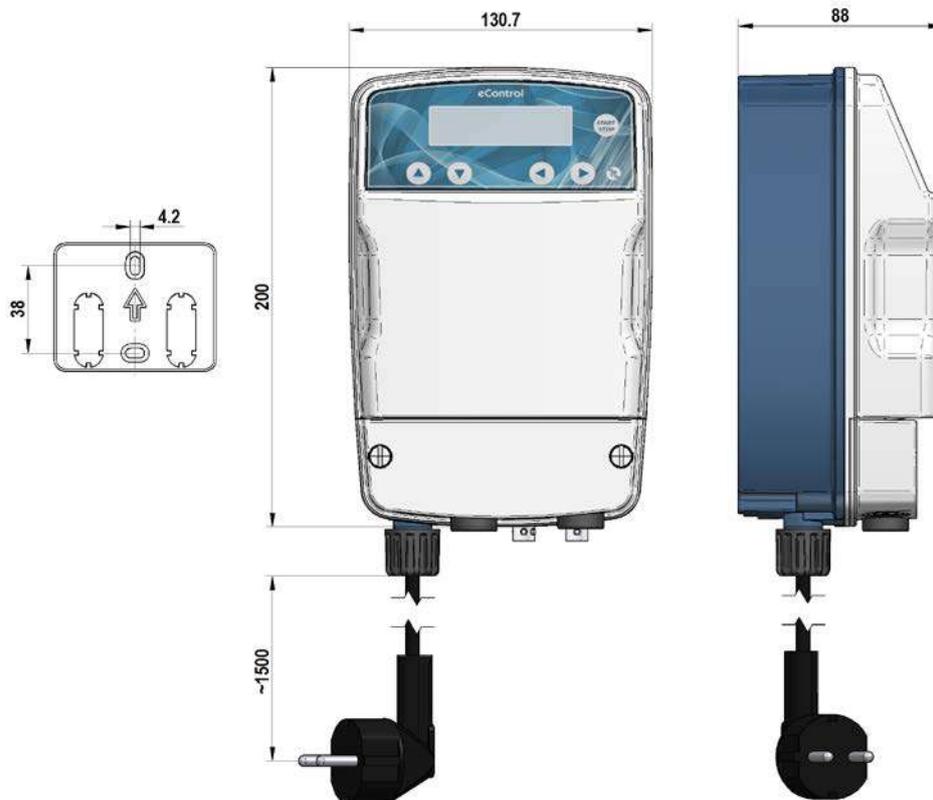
eControl instrument and plate for wall mounting (dimensions in mm.)
